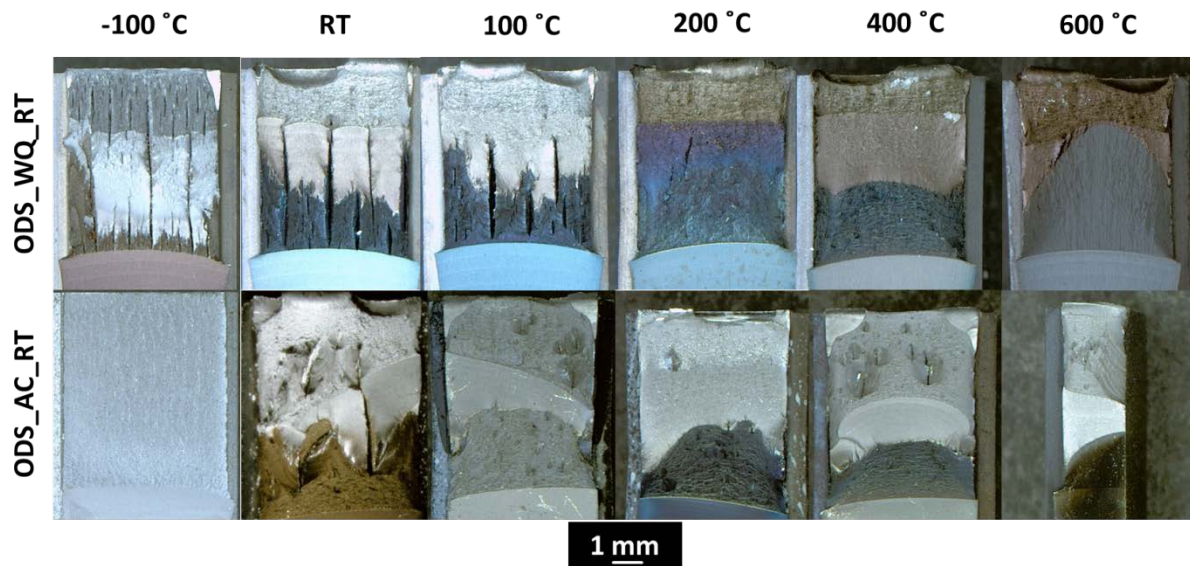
Stereo microscope macroscopic images of fracture surfaces of ODS_WQ_RT and ODS_AC_RT at different temperatures
